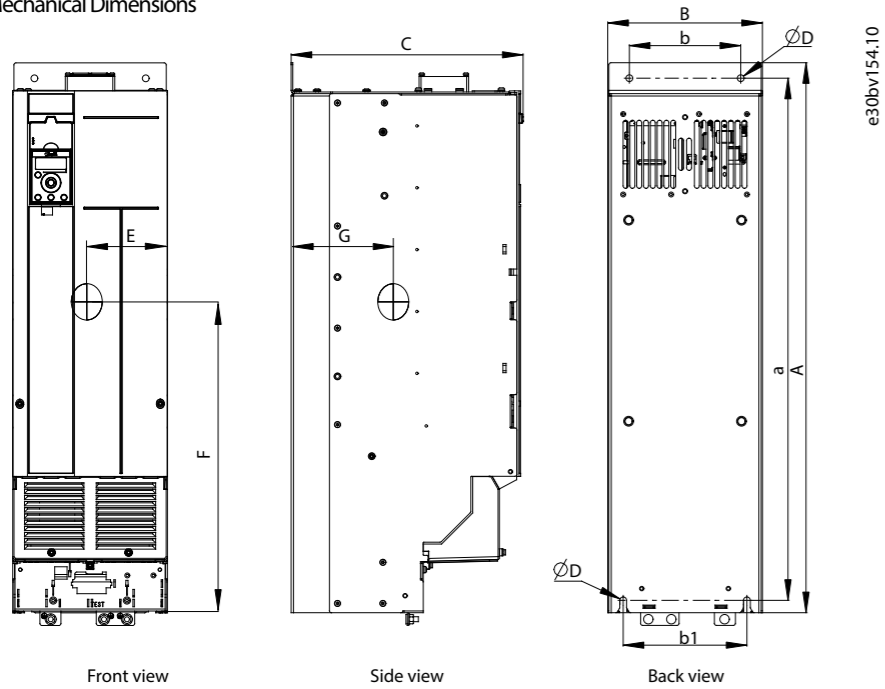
Mechanical Dimensions, Enclosure Sizes J8–J9
